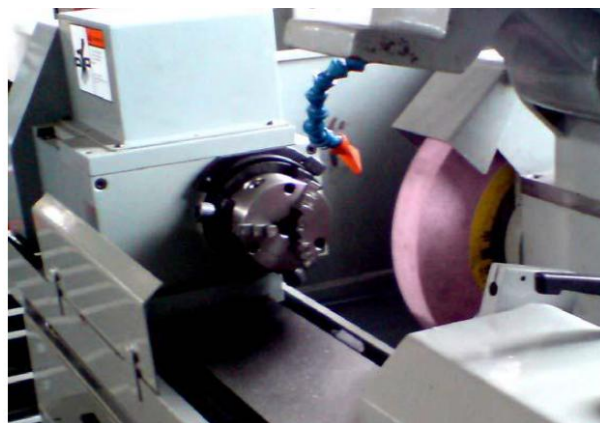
Headstock Position on Cylindrical Grinding Machine. Source: GTDMC Machining *EXTOMAX* (OCD-3260)
